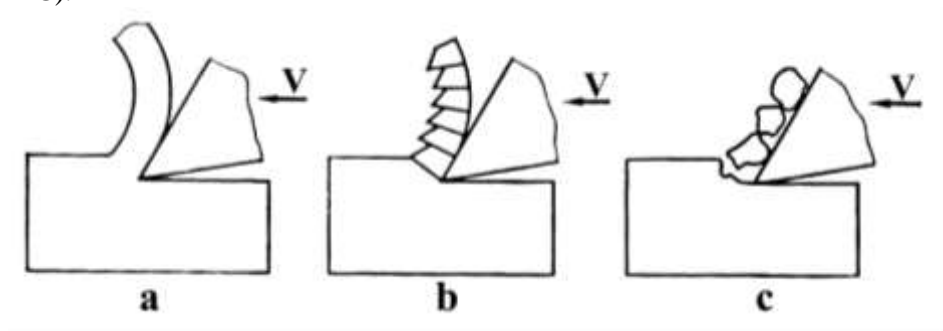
The basic types of chip: a – flowing; b – shearing; c – tearing
